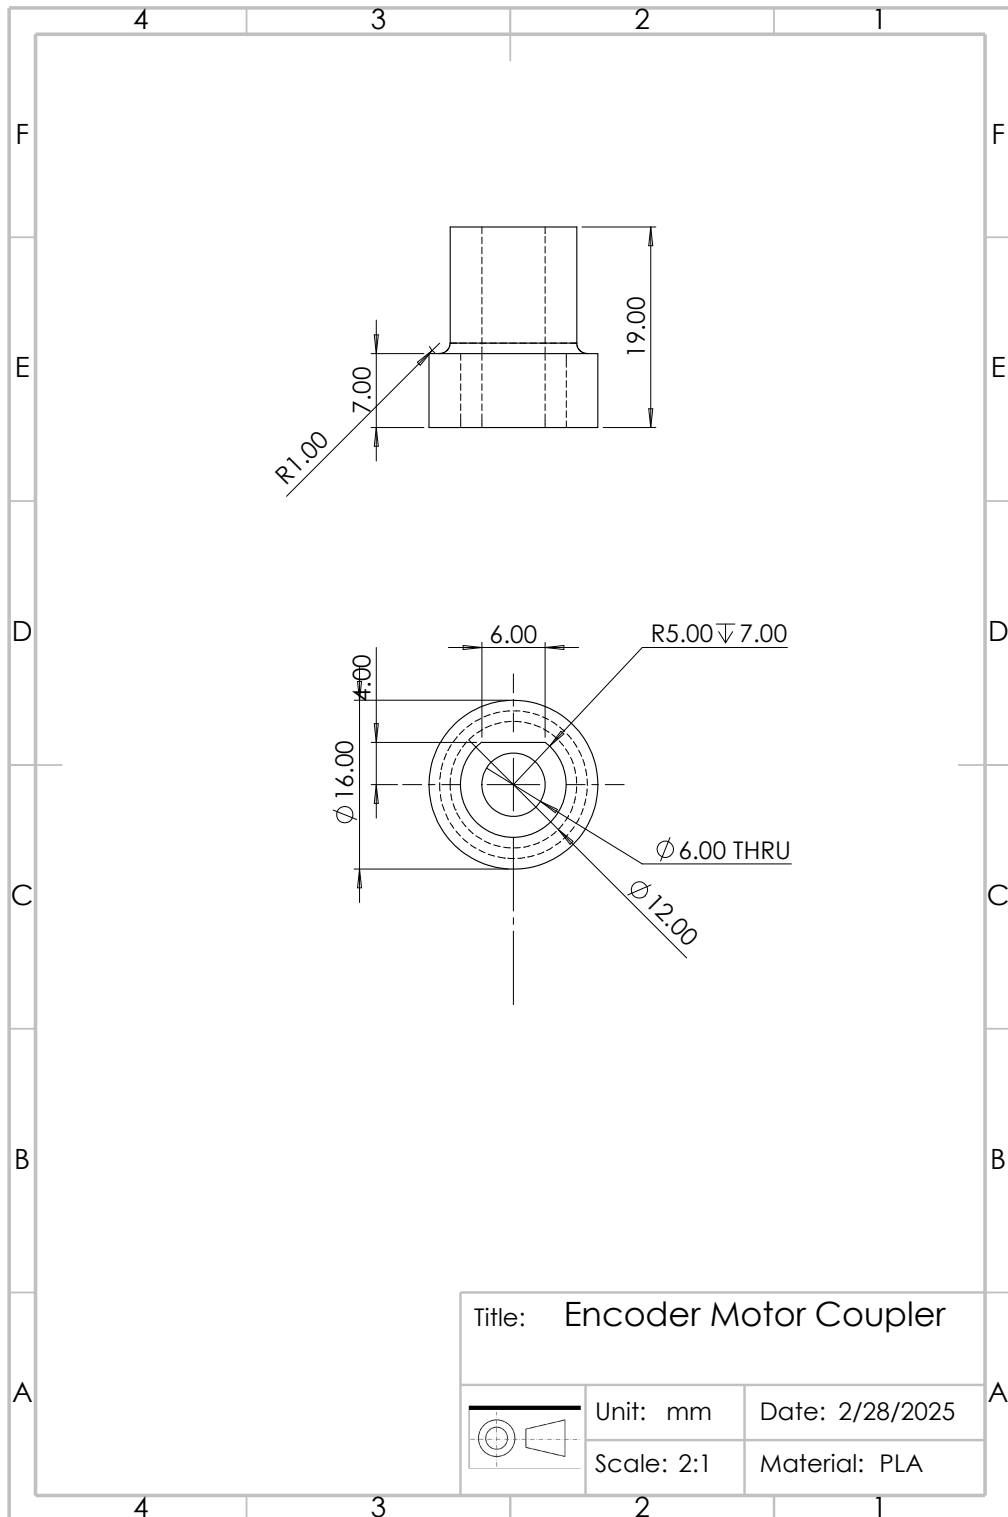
Detailed Drawing of Motor and Encoder Coupler
